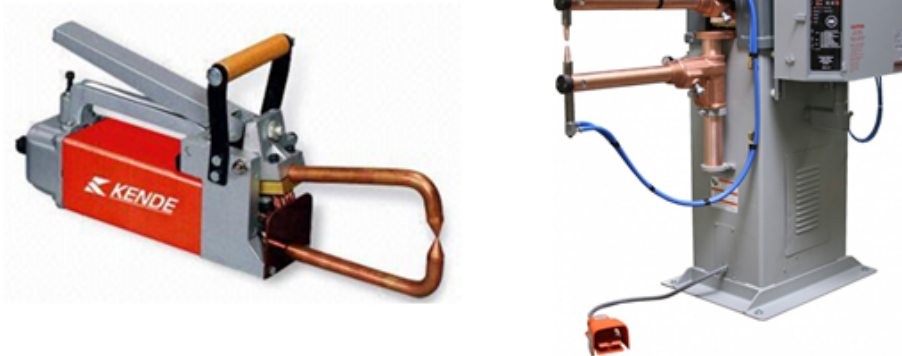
RSW machines (Left) portable and (Right) automated (*Resistance Welding Process*).
